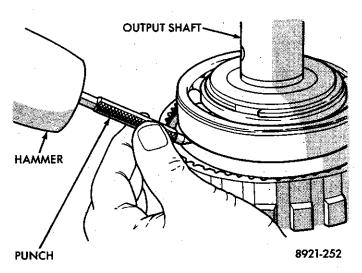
Marking Annulus And Output Shaft For Assembly Reference
